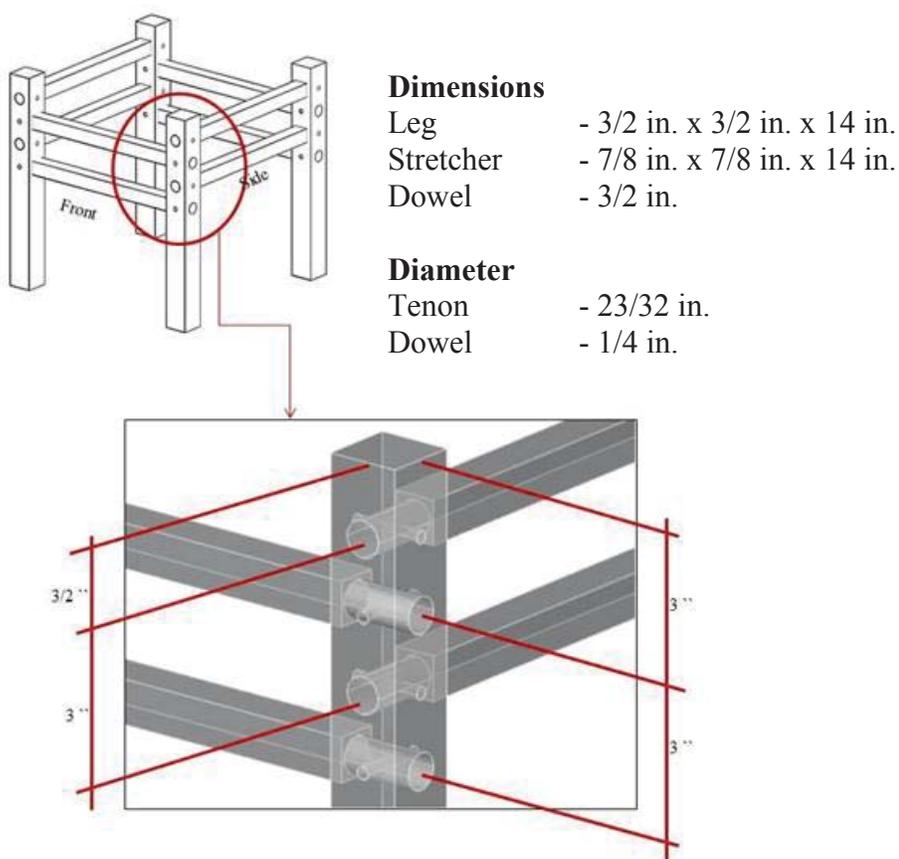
Pinned round mortise and tenon joint, two stretcher frame construction.
